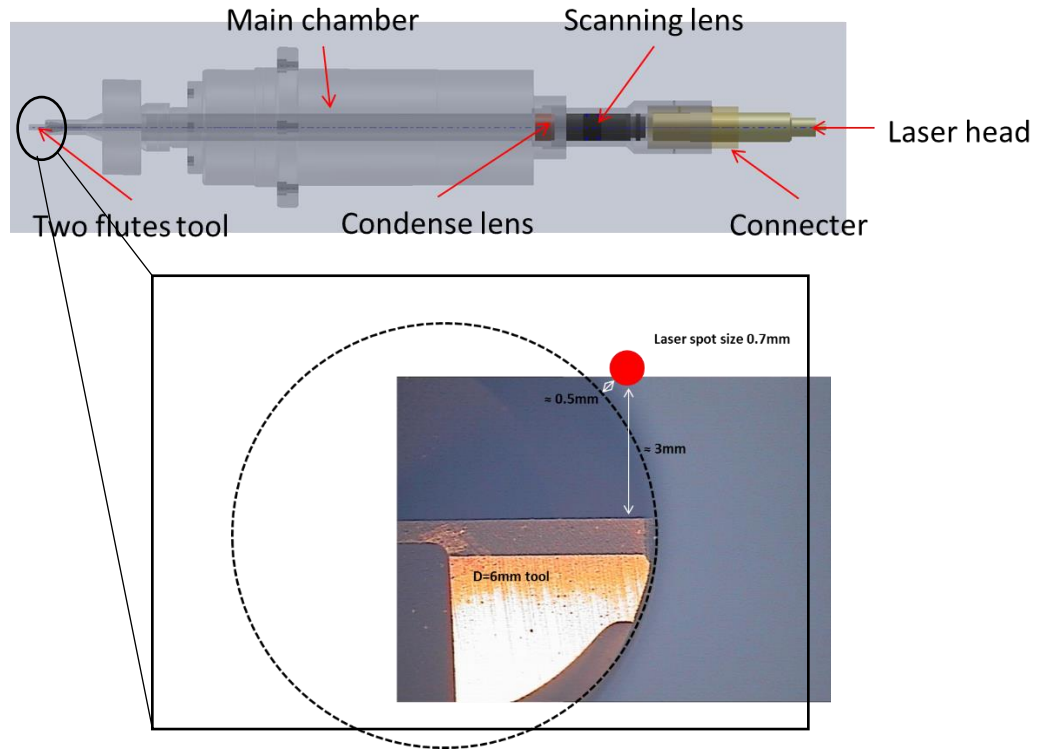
The schematic diagram of the coaxial laser milling tool setup.
